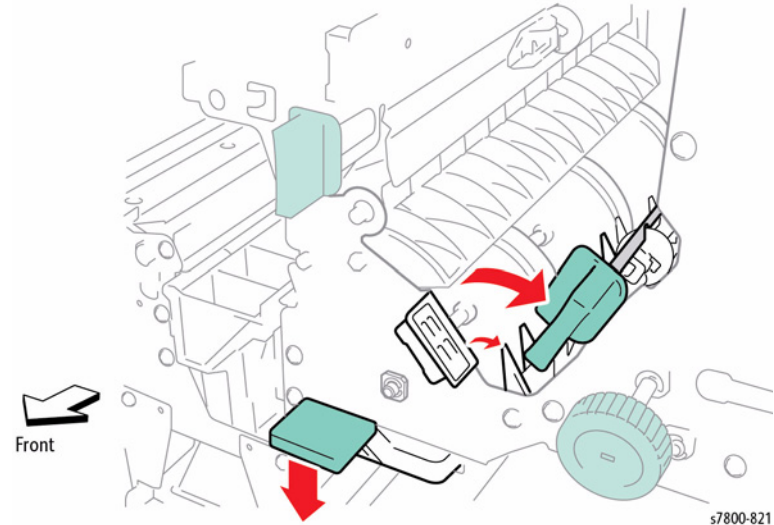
Opening the Lower Exit Chute and the Bottom Buffer Chute
